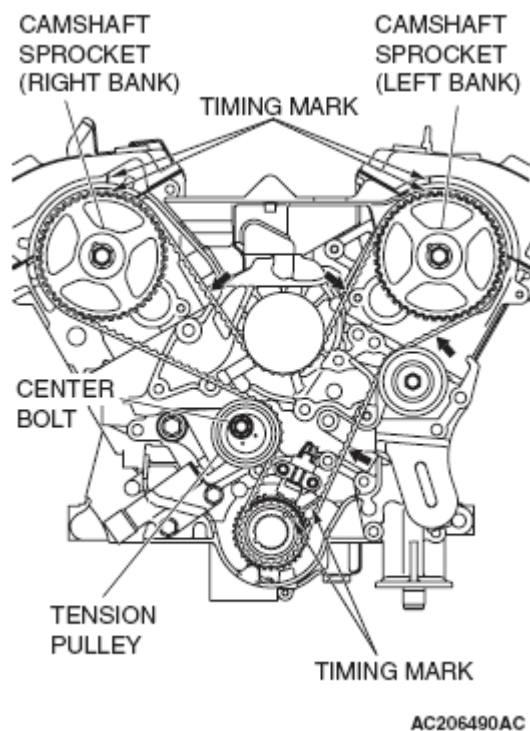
Identifying Timing Marks On Timing Belt And Camshaft Sprock
